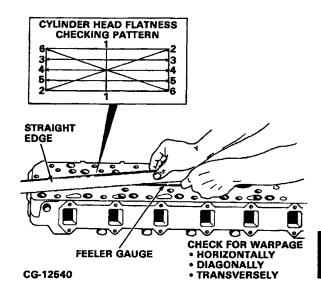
Inspect Cylinder Head for Warpage
